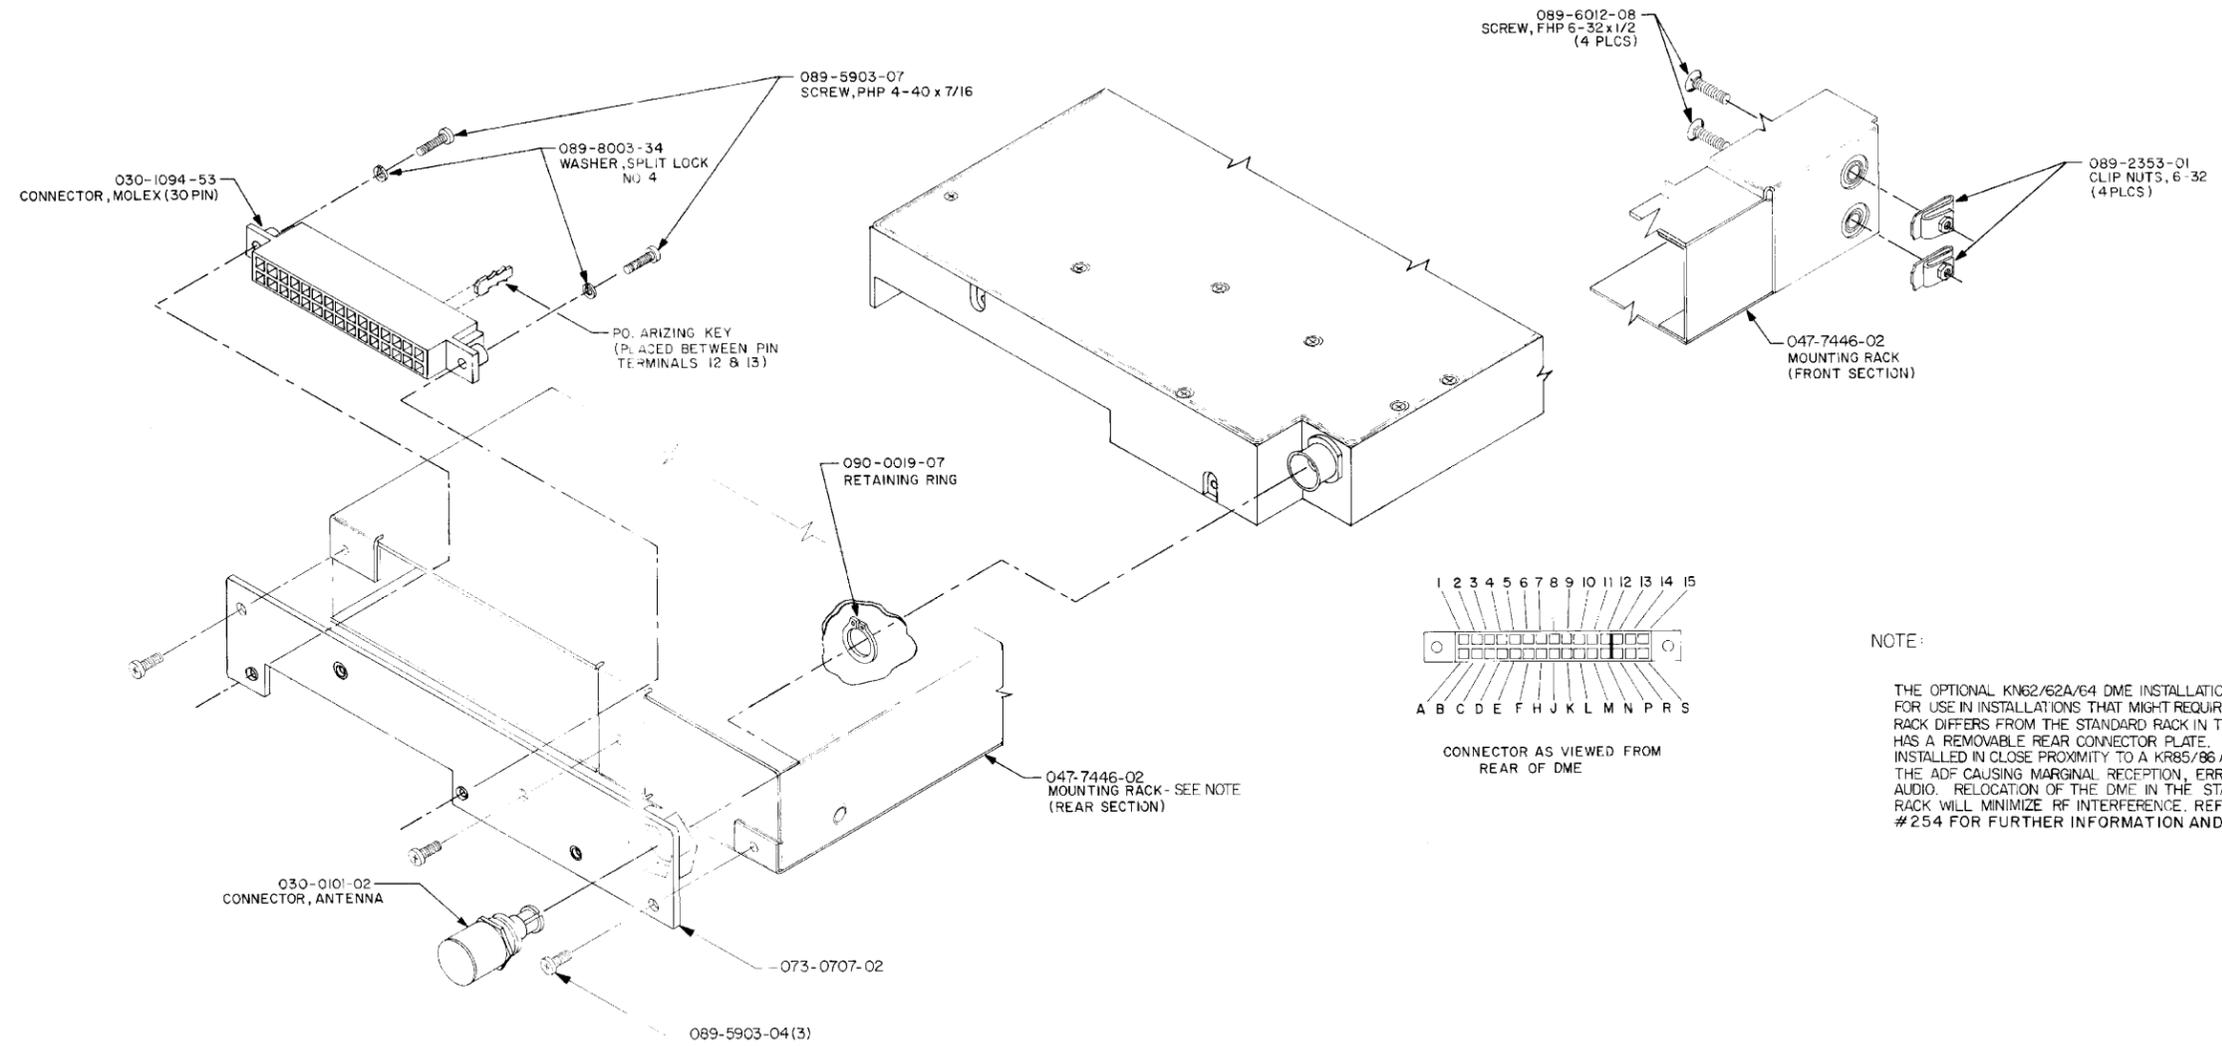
KN 62/62A/64 OUTLINE AND MOUNTING DRAWING
